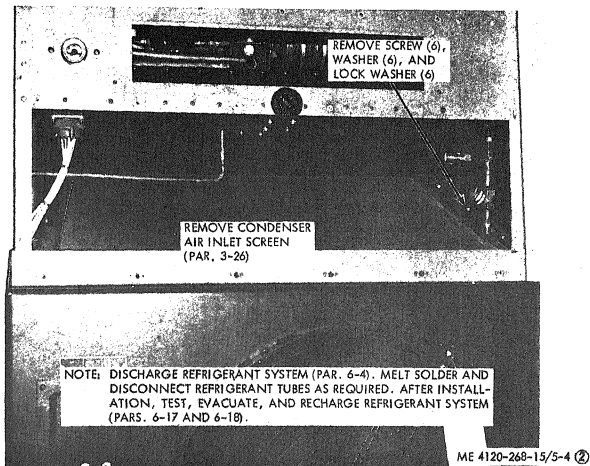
Condenser coil removal and installation (Sheet 2 of 2).
